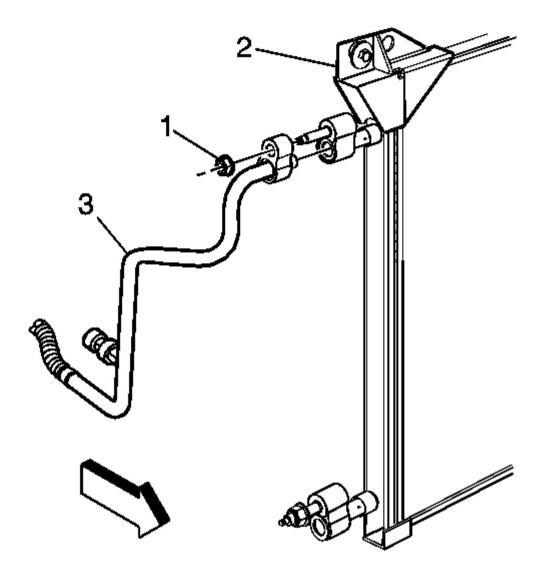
Discharge Hose Nut & Condenser Courtesy of GENERAL MOTORS CORP.
